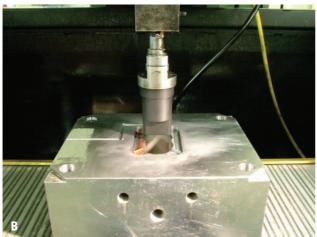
(A) A machined graphite electrode that acts as the cutting tool in a sinker EDM. (B) The electrode mounted in the EDM to produce a mold cavity. (C) The work being machined by the EDM must be submerged in a liquid called dielectric fluid during operation.
